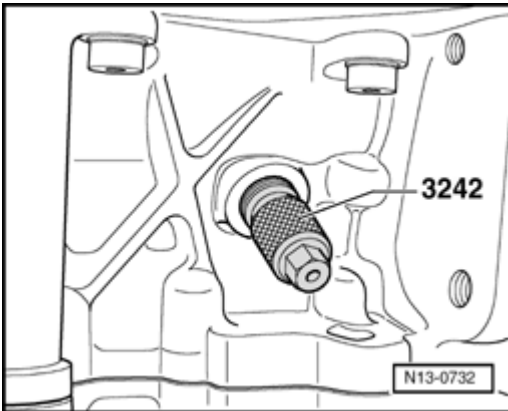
Crankshaft Holder 3242 - Securing Crankshaft From Turning
